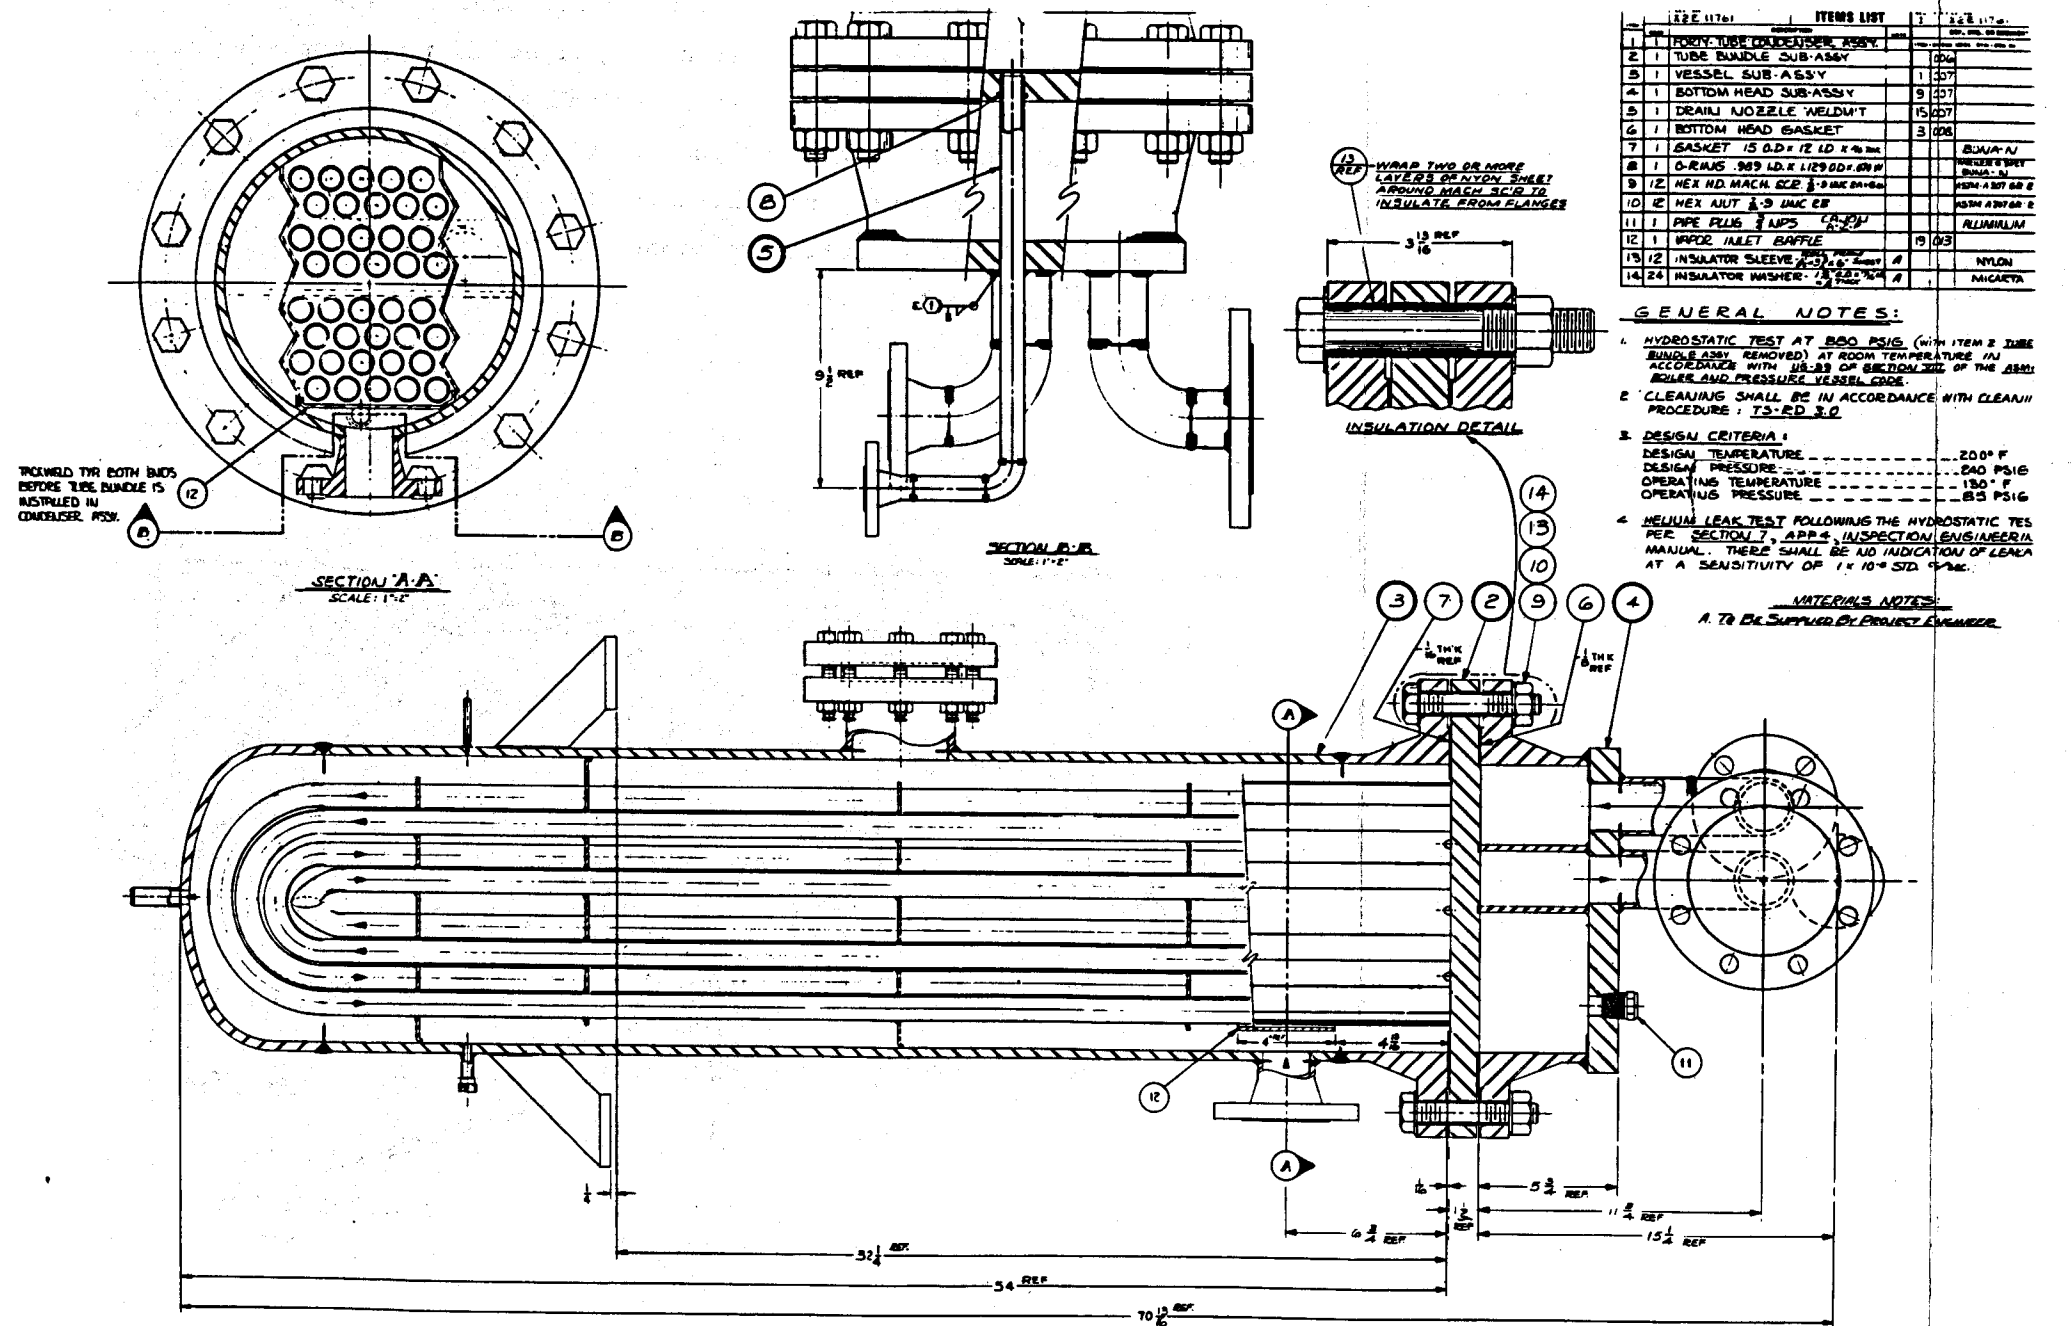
The ORNL 40-tube condenser - assembly drawing.
